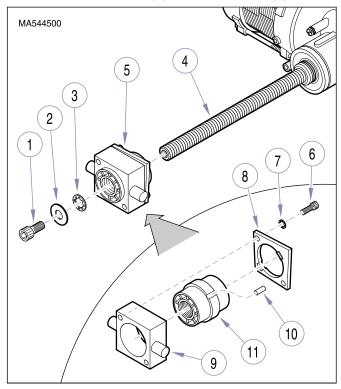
Base Motor Trunnion / Drive Nut Removal / Installation
